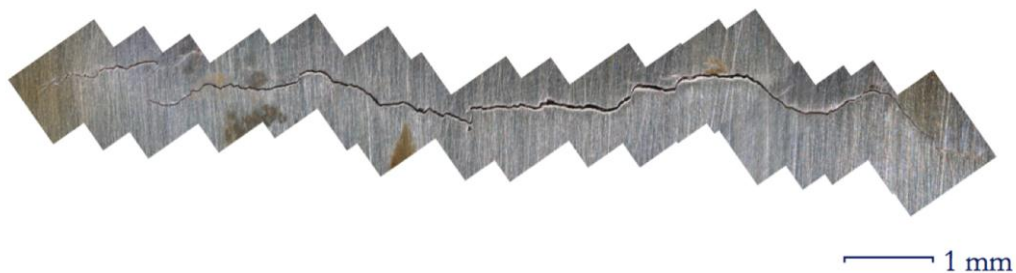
Example thermal fatigue flaw surface image found in one of the test pieces.
